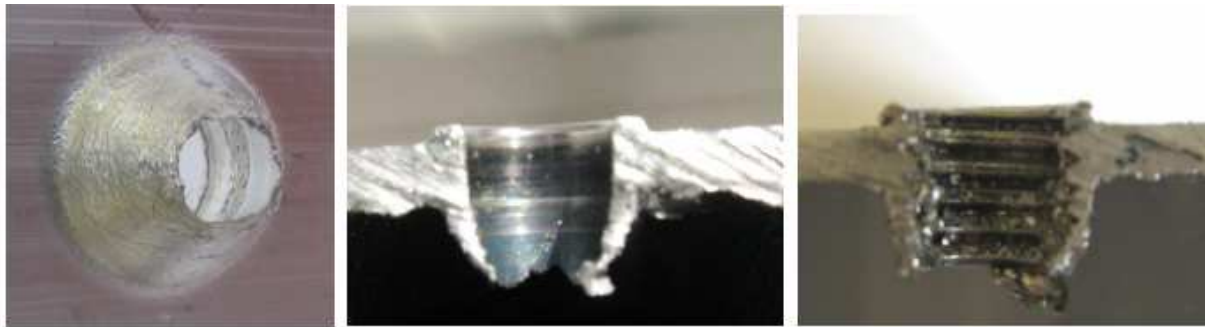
Shape of Al busher Fig. 13. Al busher, 2490 sp/min Fig. 14. Rolled threads, aluminium
